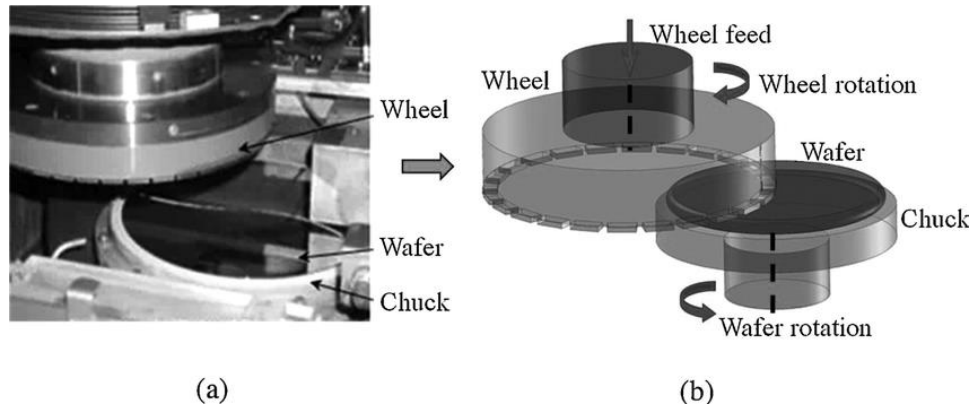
Schematic of self-rotating grinding mechanism: (a) Experimental set up of wafer grinding; (b) Illustration of the rotating wafer and wheel
